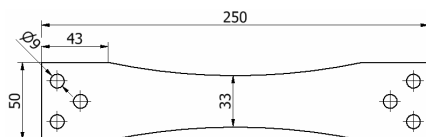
The geometry of the modified non-welded specimens cut out with a plasma cutter.
